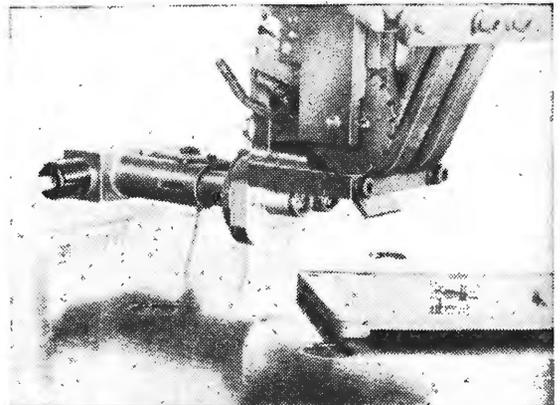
Optical location attachment fitted to a bench machine to facilitate positioning of the printed-wiring board before insertion of a component.
